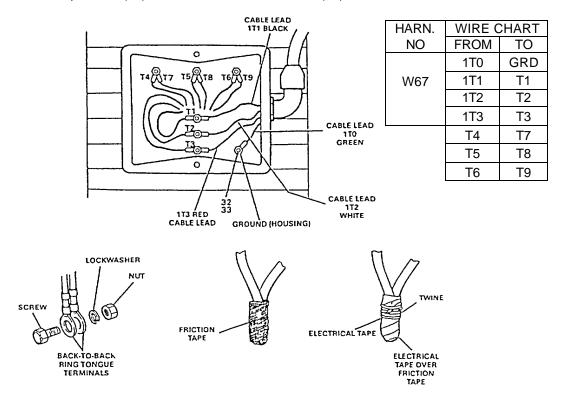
Air Compressor Motor (sheet 2 of 2) Connections
